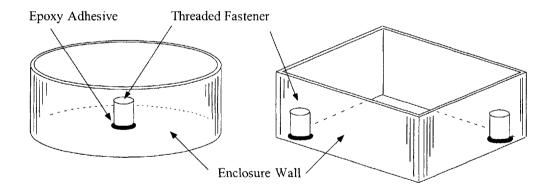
Enclosures with Blind Type Threaded Fasteners.
